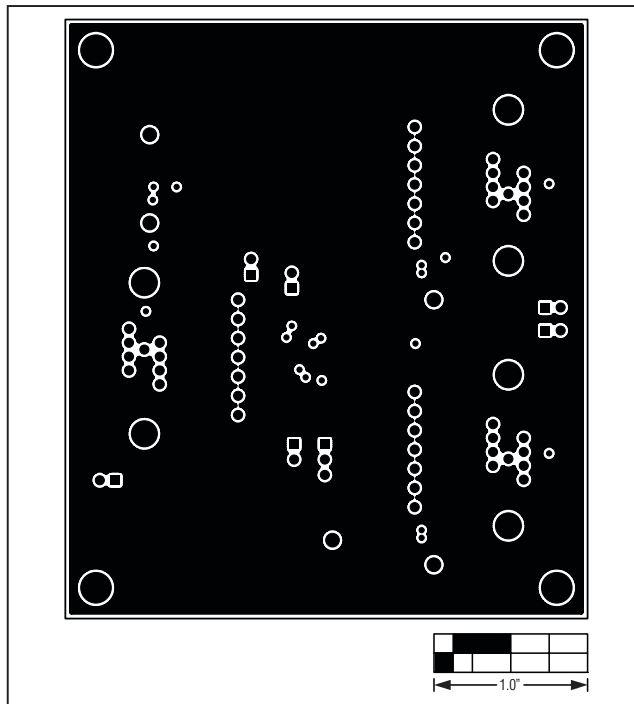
MAX4885AE EV Kit PCB Layout—GND Layer 2
